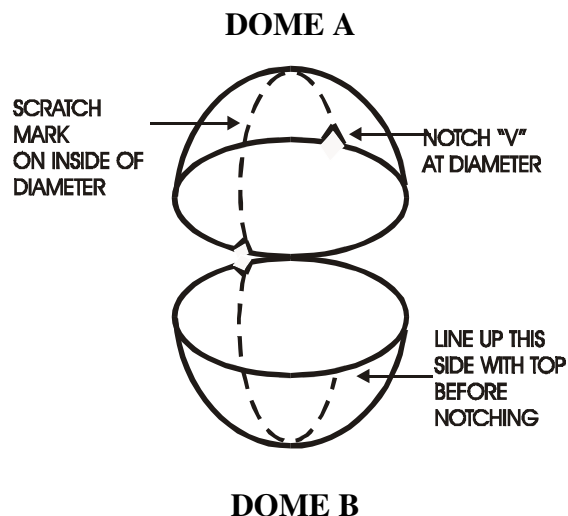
Marking the Bead Hole Location. Diameter lines on the disc mark the points for locating the seam line bead holes. After notching, the domes are glued together; filing or drilling rounds out the marked holes. After removing the glue, one dome is tack soldered in preparation for the final solder.
